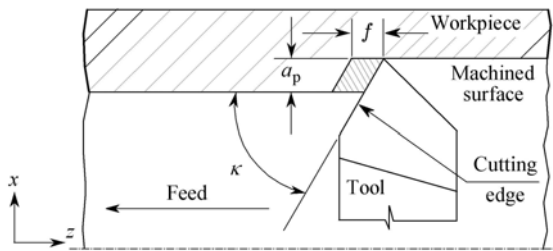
Schematic view of metal cutting of the hollow cylinder
